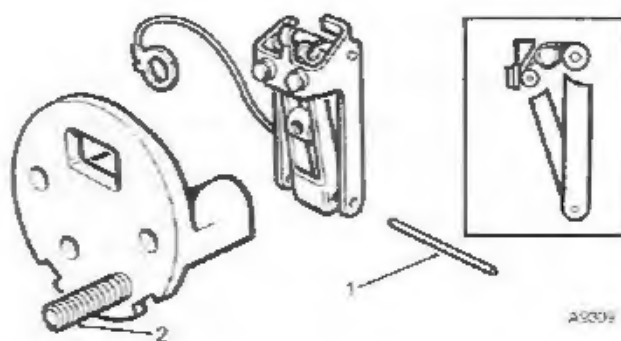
Fitting the rocker assembly to the pedestal. (Inset) the correct position of the centre toggle spring.
